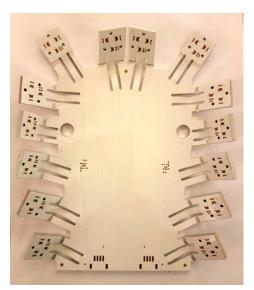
Creative design with IMS allows forming in three dimensions to streamline product assembly while maximizing thermal performance of the circuit board.
